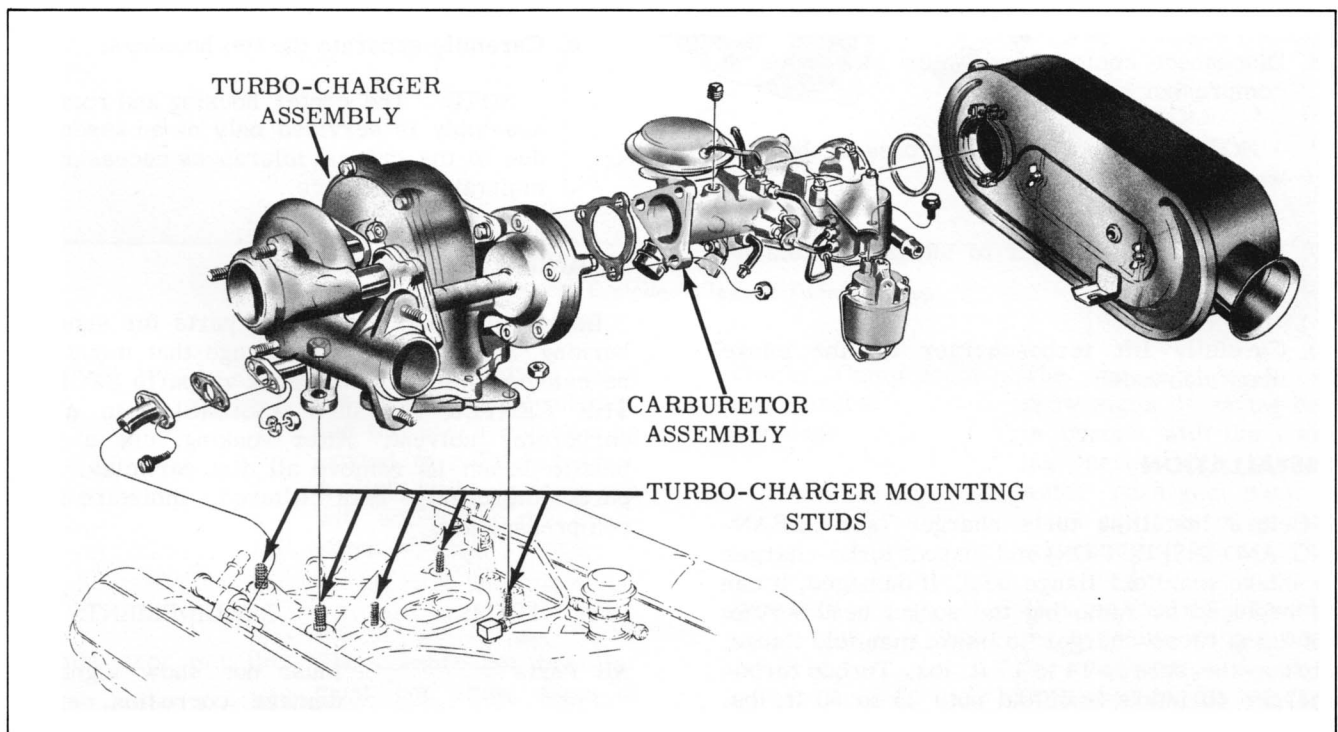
Turbo-Charger and Carburetor Attachment
